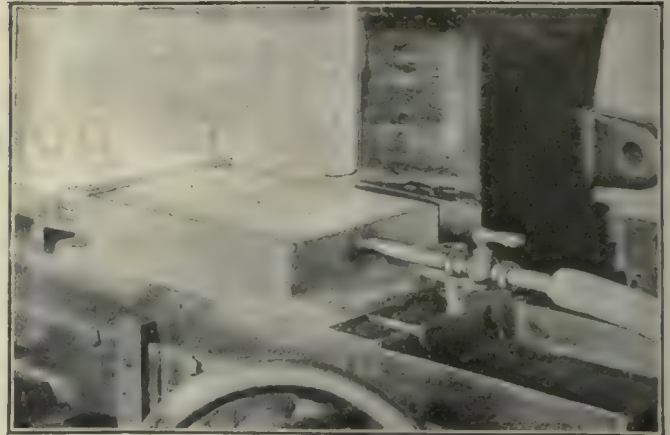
SMALL SIZE OF VACUUM CHUCK PLATE WITH SINGLE GASKET
